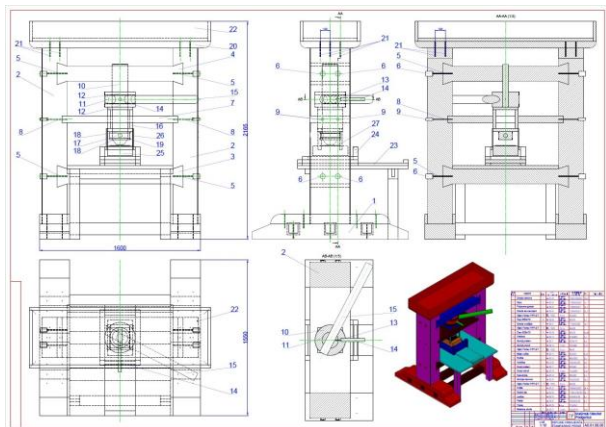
Assembly drawing of the Crnojevic printing press replica
